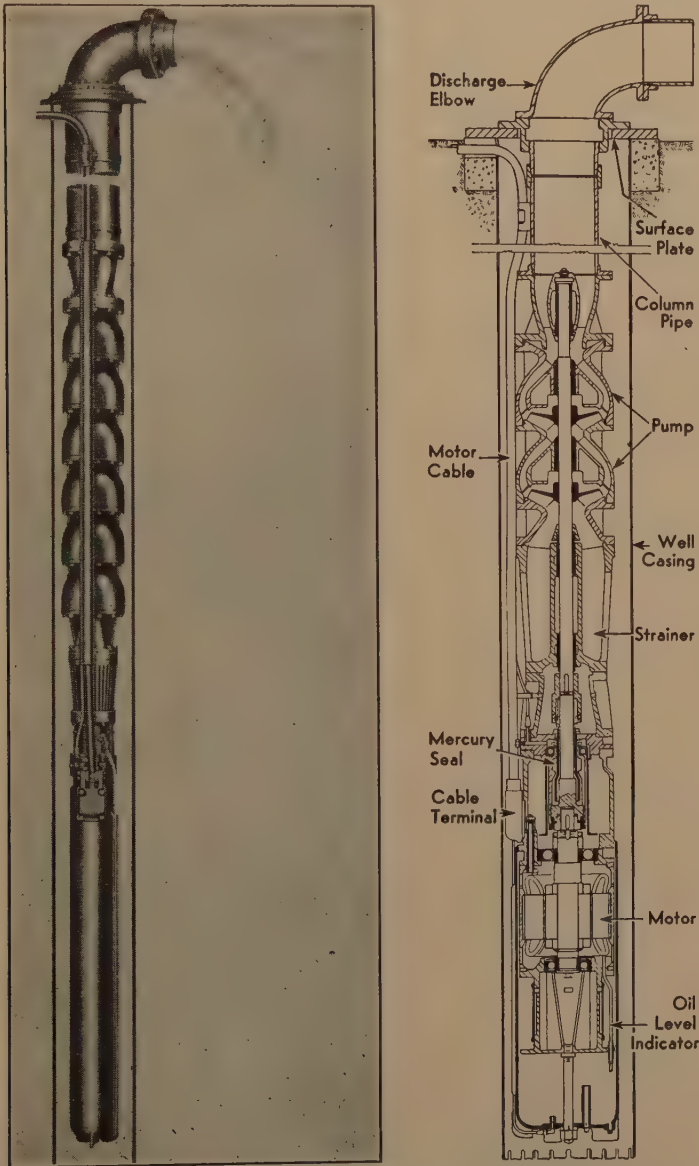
DETAILS OF PUMP ARRANGEMENT.
